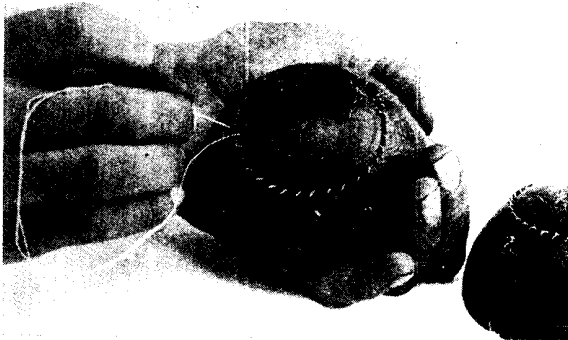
Two wire retaining rings are sewn to the ebonite ring halves of the stator to hold the windings in position, as shown more clearly in Fig. 3 ready for assembly in the stator
